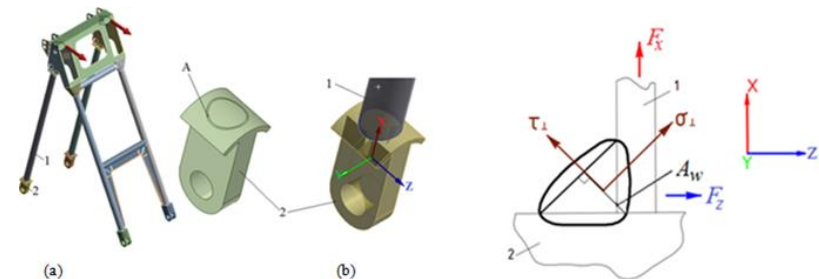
The connection for determining the welded joint load of the pipe with the casting: general view of the biped rack (a) and the creation of connection (b); 1 – pipe; 2 – casting; A – projection of the pipe end onto the surface of the casting
